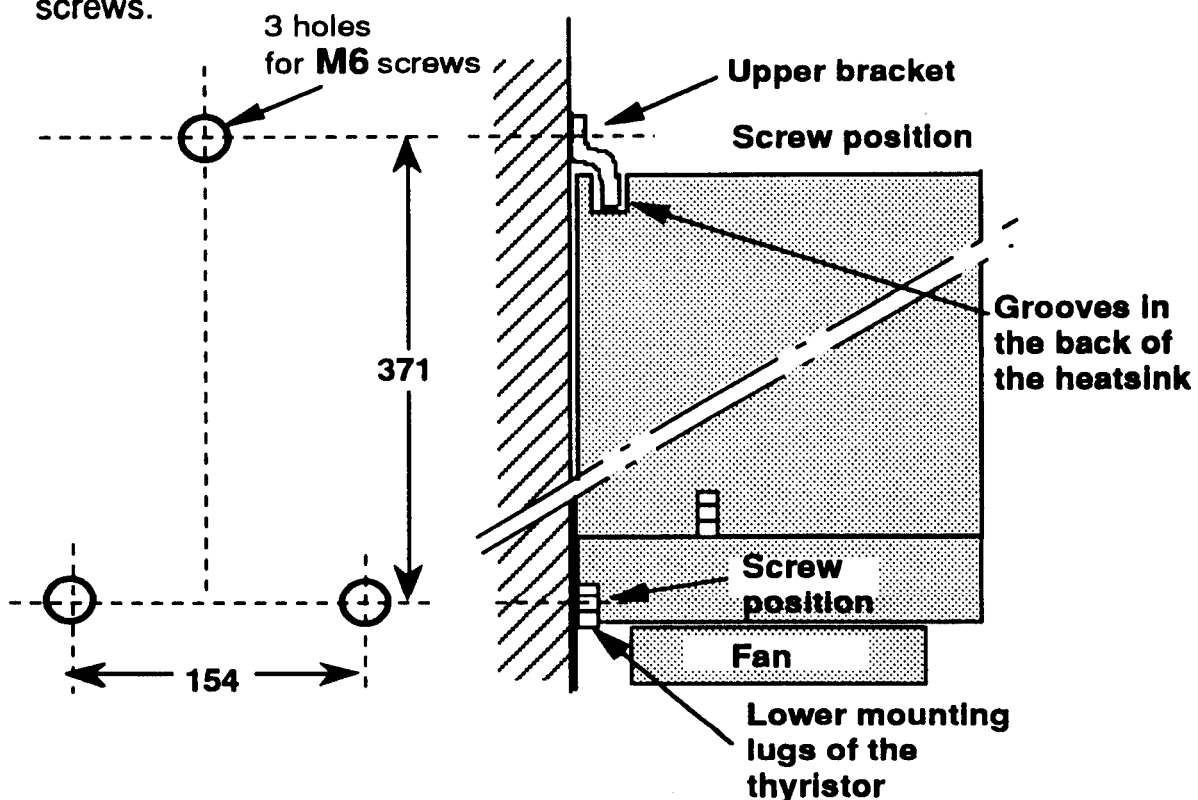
Drilling details and mounting of a convection cooled unit, bulkhead mounting
